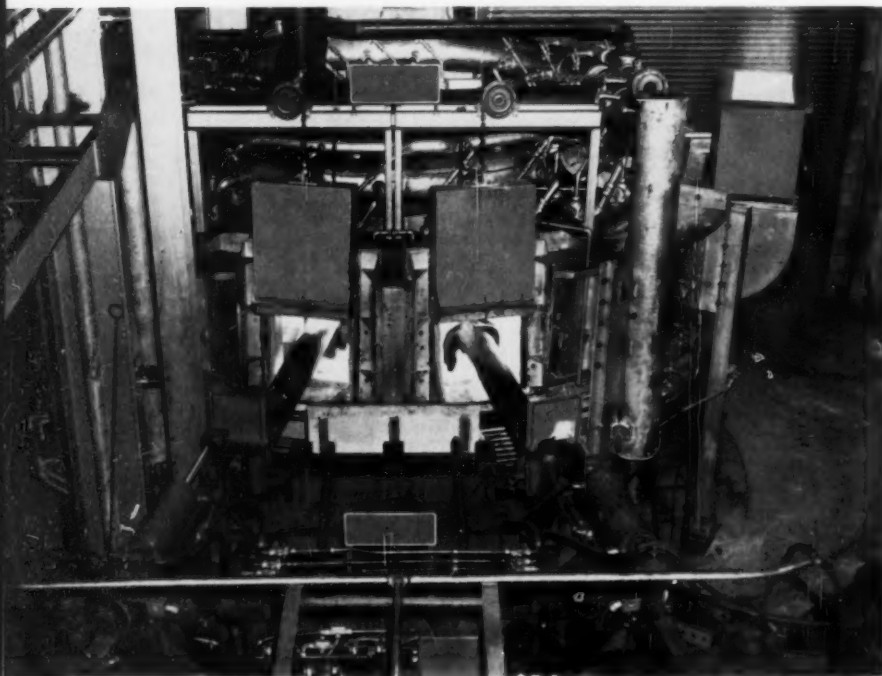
While a Cold Billet Is Placed on Inner Row of Furnace Hearth (Left), a Heated Billet Is Removed From Outer Row (Right)
